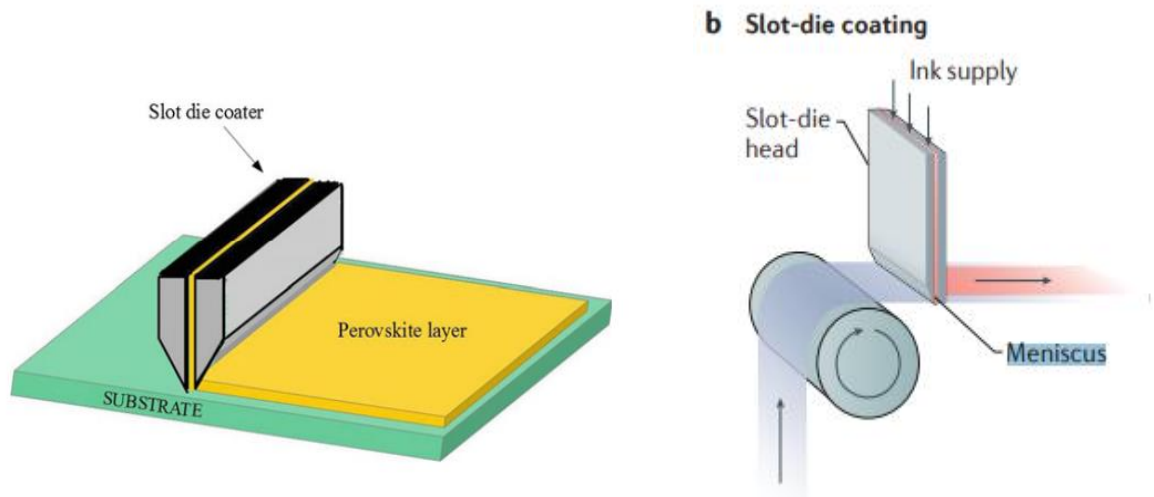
Perovskite layer deposition using slot die coating technique [78]
